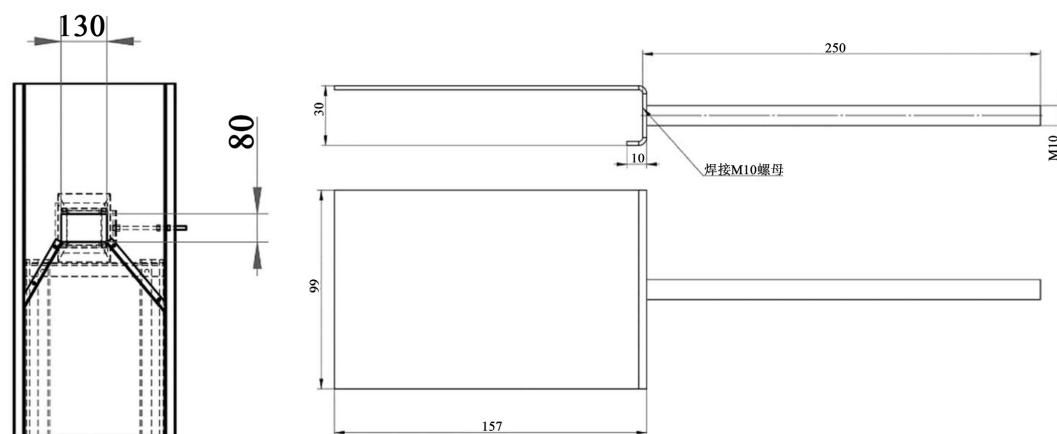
Structure diagram of vibration trough material outlet and shrinking door
